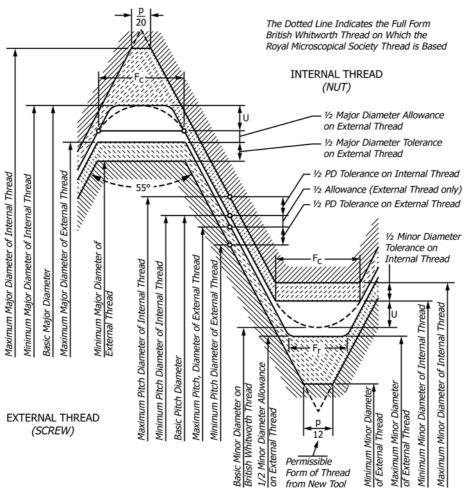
Disposition of Tolerances, Allowances, and Crest Clearances for AMO Thread
